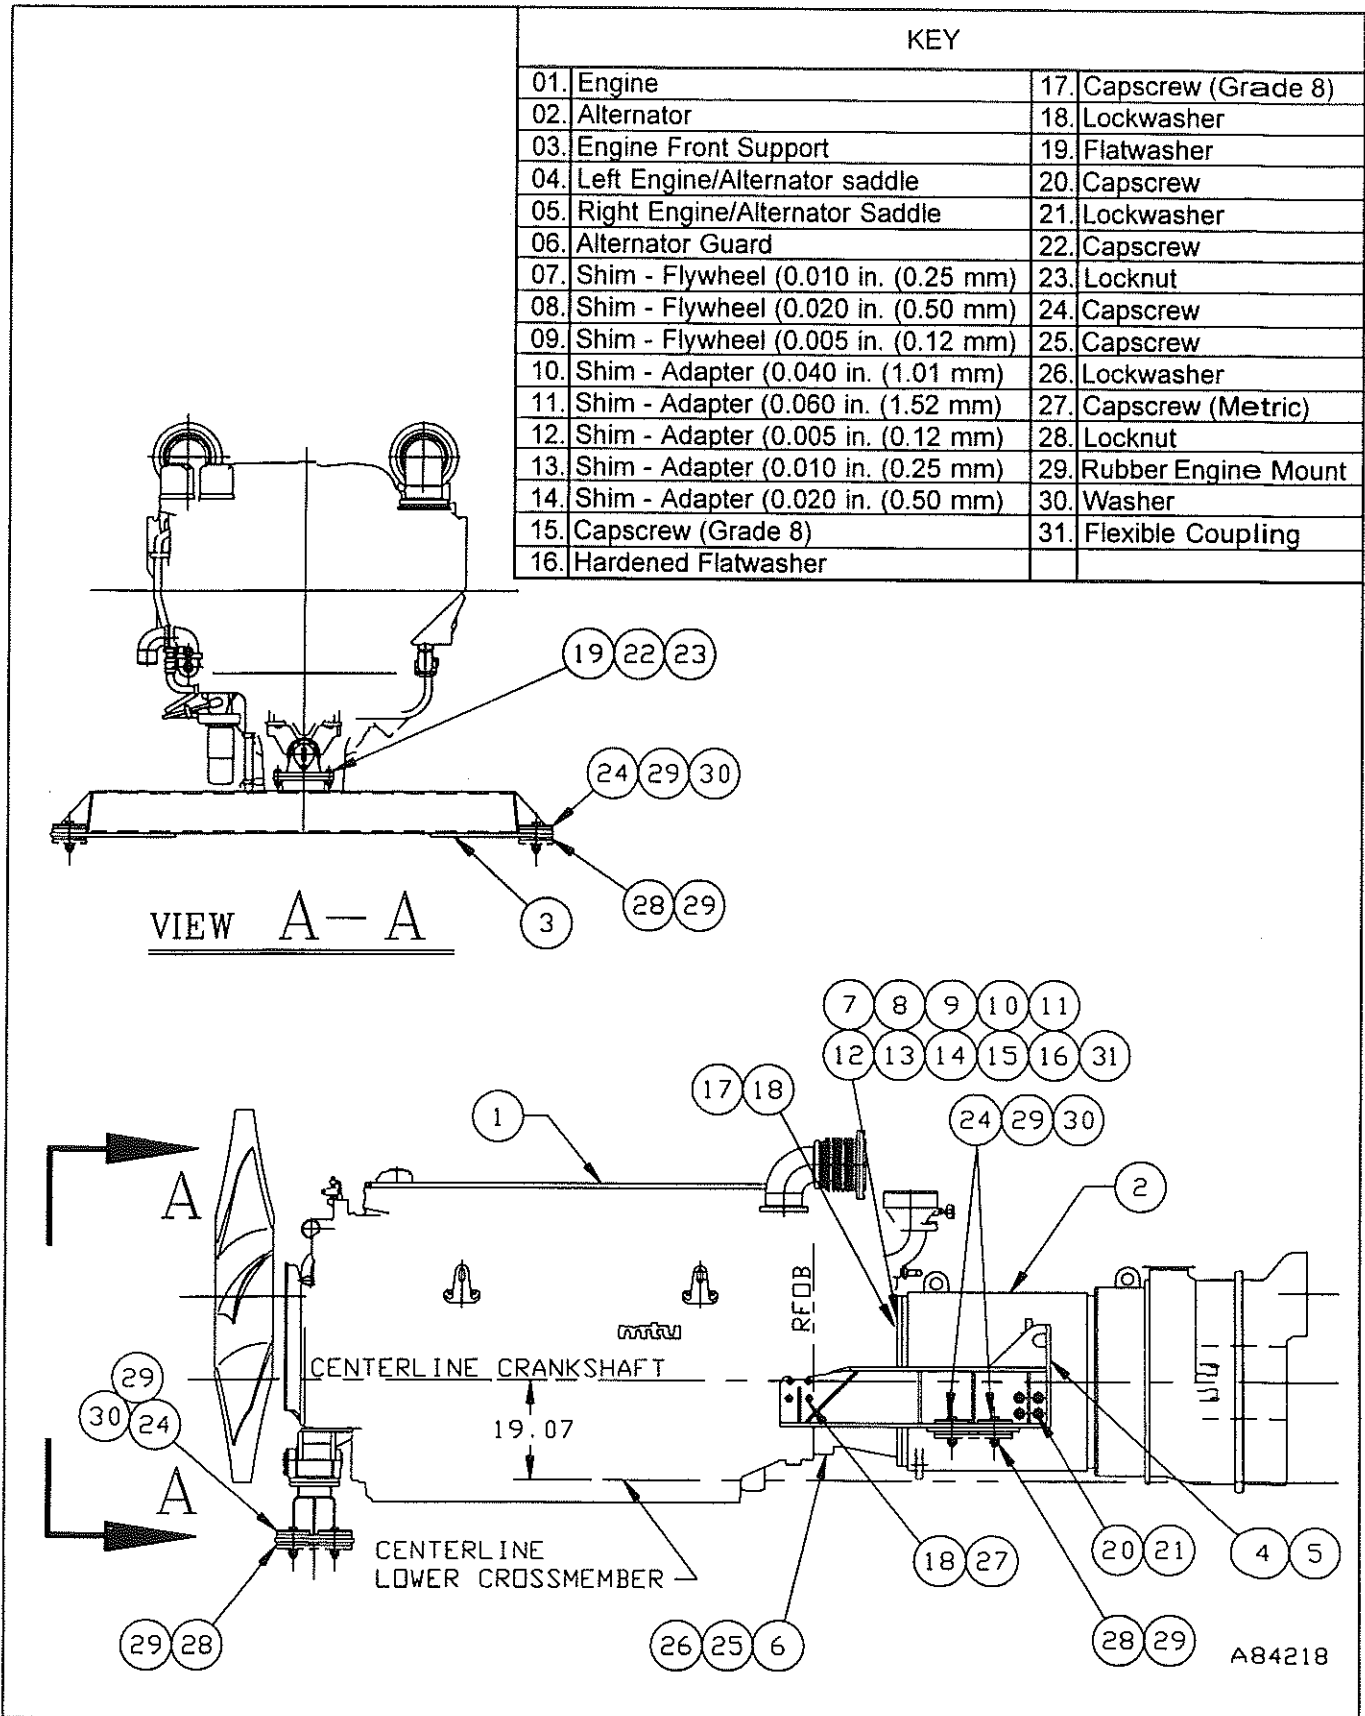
ENGINE AND ALTERNATOR MODULE ASSEMBLY
